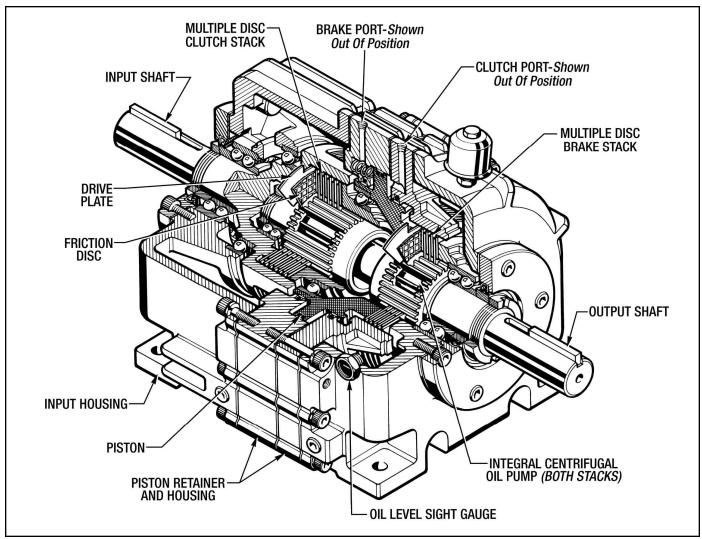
Size 03 to 20 Posidyne Clutch/ Brake Cross Section
